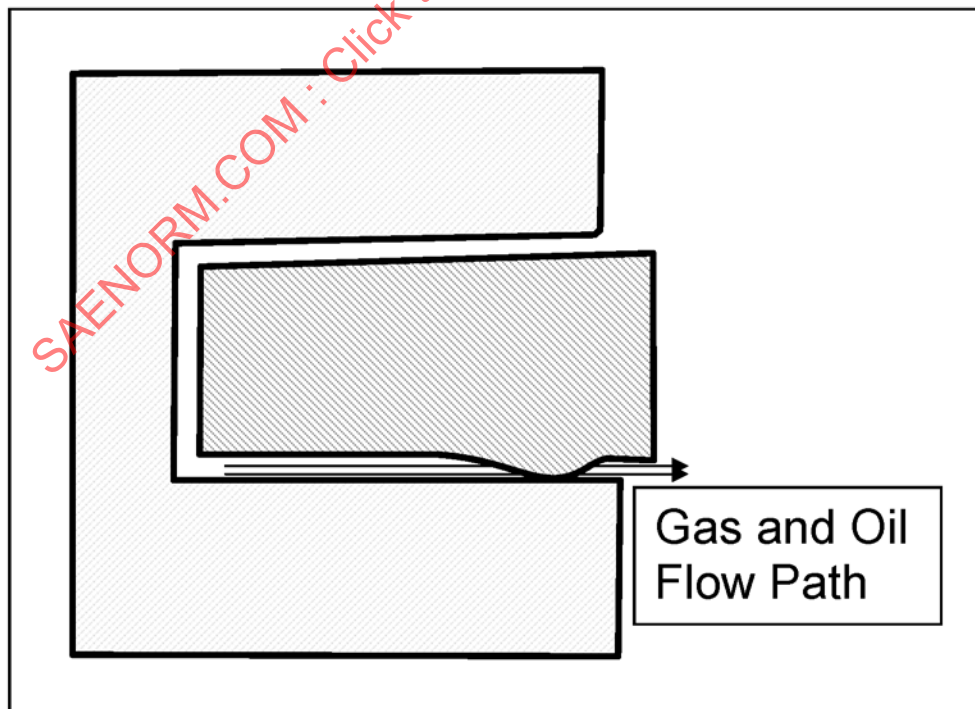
PISTON RING STRAIGHTNESS EXAMPLE
